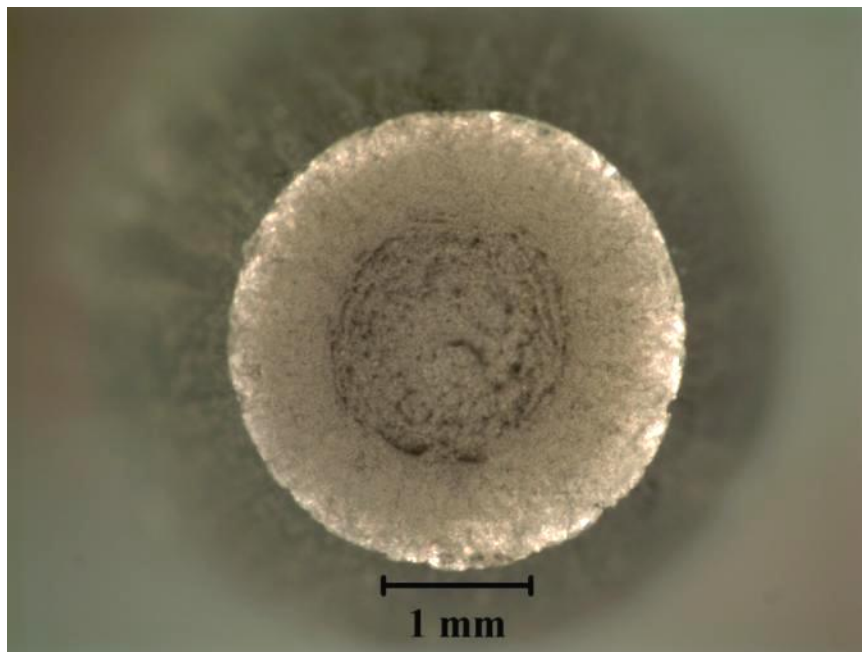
Fracture surface of 17-7 HSSS
